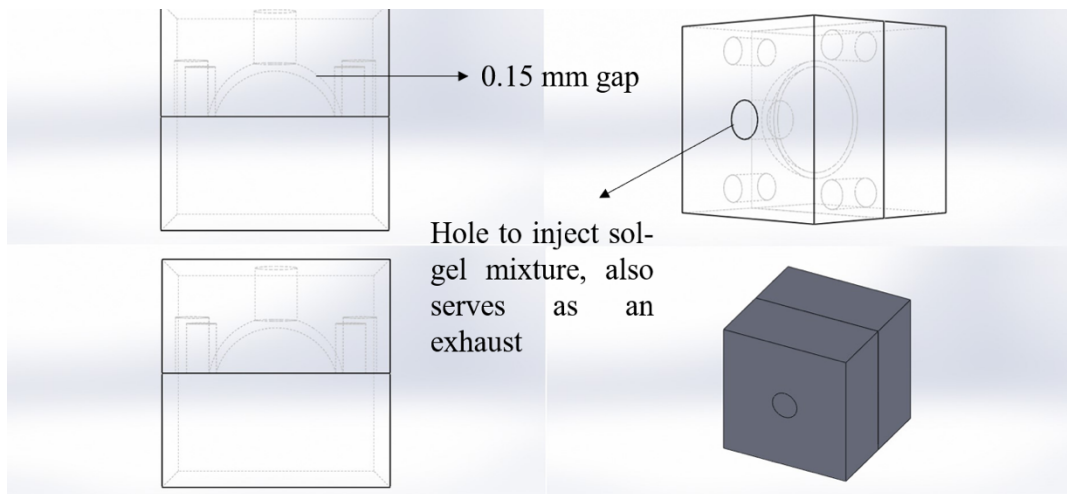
The conjoined form of the mold for contact lens type thin films, the hole on the top of part B allows the sol-gel mixture to be directly injected into the mold and also serves as a gas exhaust
